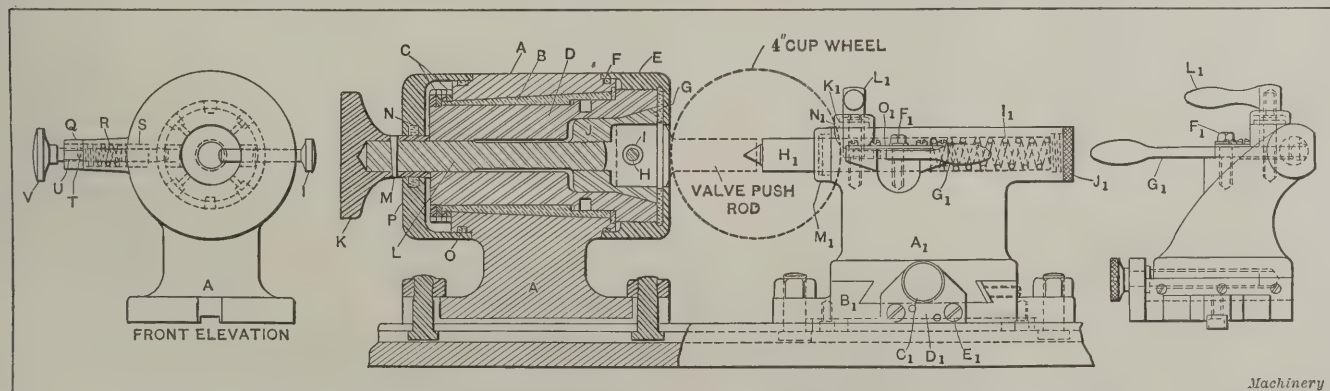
Fixture used in Grinding the Square Body of the Valve Push-rod shown in Fig. 1
